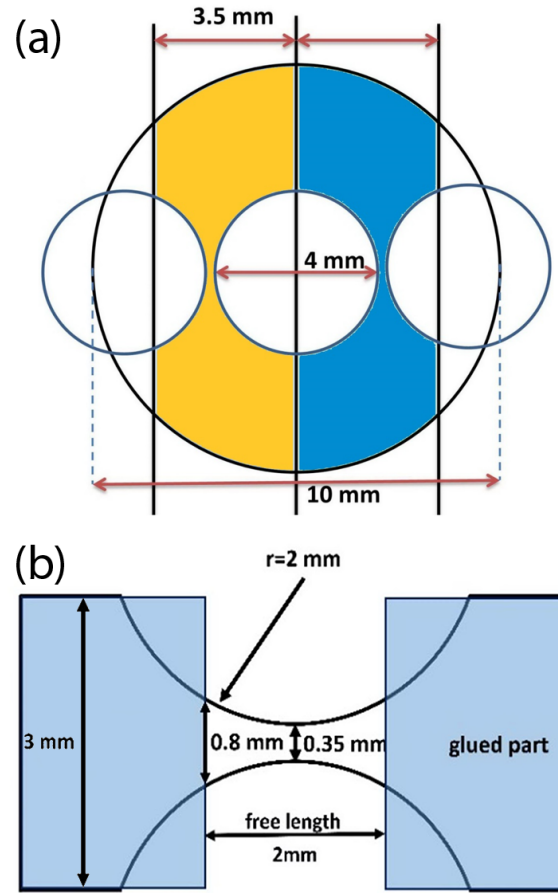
Schematic of sample dimensions after punching is shown in (a). The yellow and blue area show the two samples that are obtained from the final cut. (b) shows a the sample ideal sample dimensions [33].
